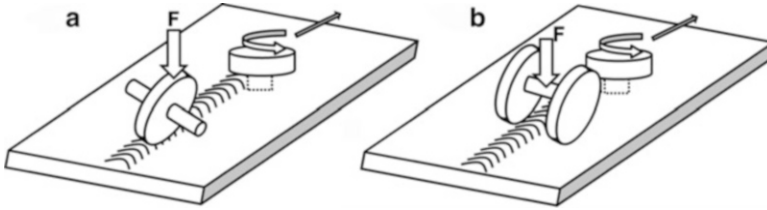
Schematic illustration of roller tensioning technique; (a) rolling of the weld beam—in-situ and post-weld both possible and (b) rolling of the material adjoining welded zone (adapted from Altenkirch et al. 2009a)
